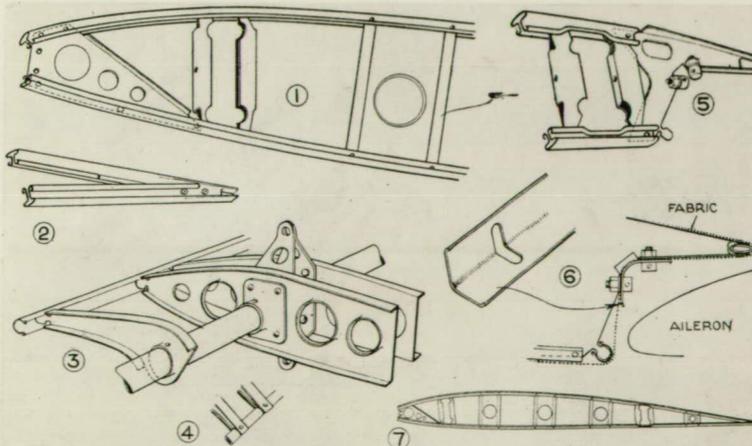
The main wing ribs are of duralumin and take the form shown in 1 & 2. The Bristol Frise ailerons are illustrated in 3 & 4. The manner of attaching the fabric over the rear spar to house the aileron is shown in 5 & 6, while 7 shows a complete rib.
